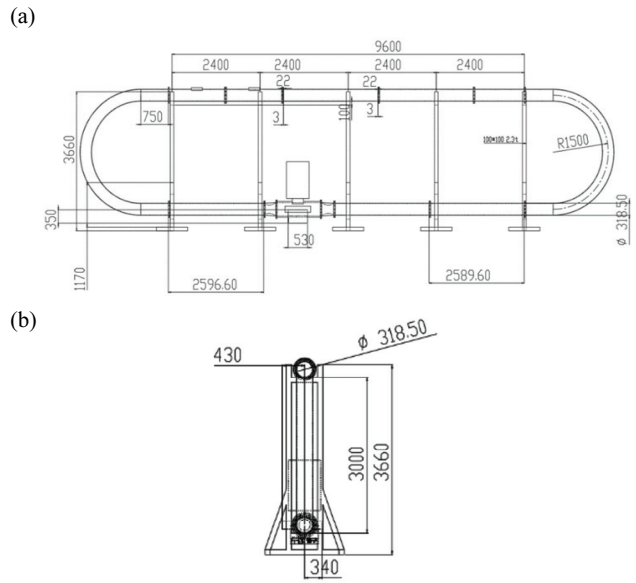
(a) Front view and (b) side view drawings of simulated pipeline equipment.
